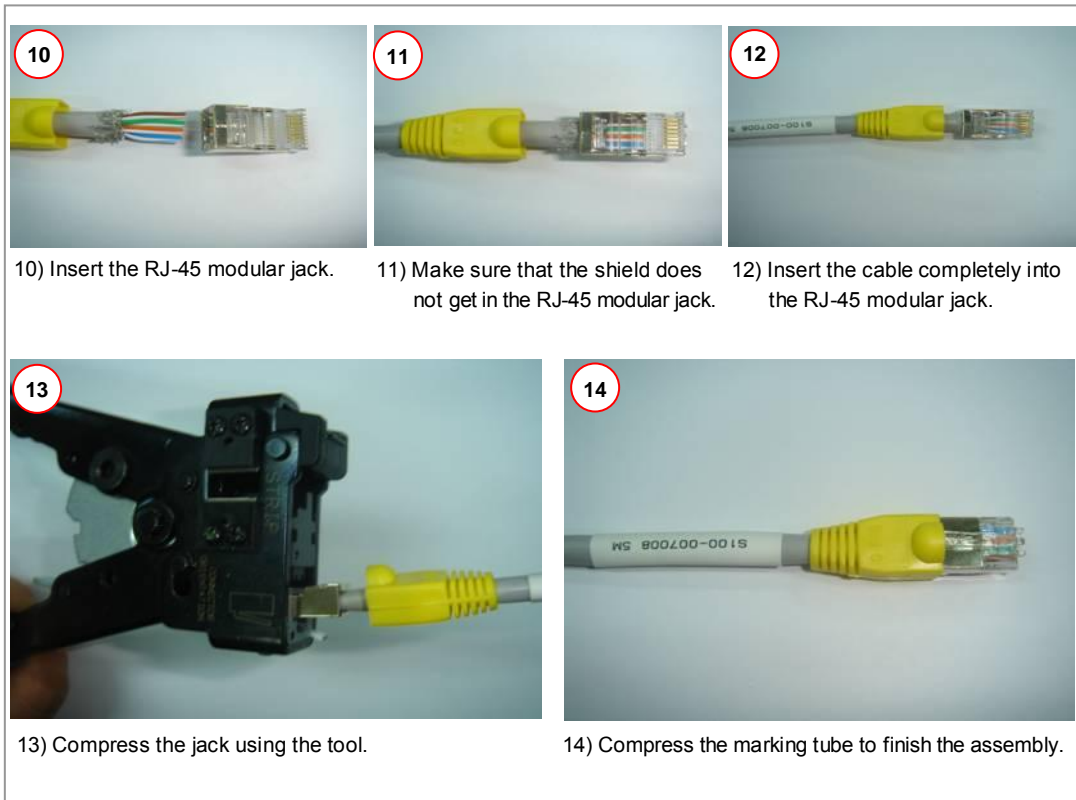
Assembling the RJ-45 Connector (Shield Type) (2)
